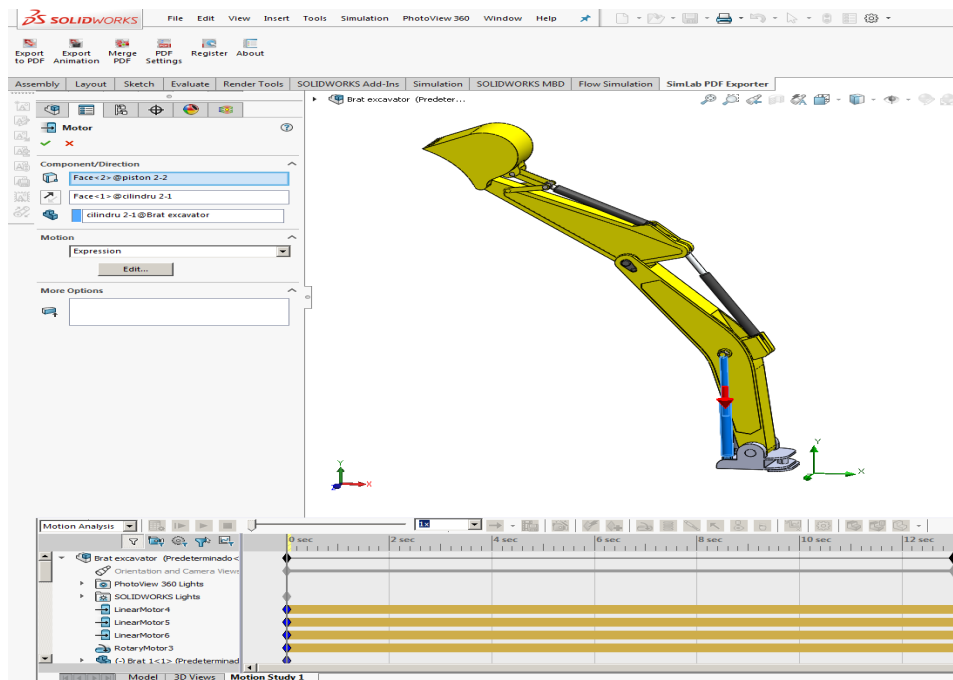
Attachment of the linear drive motor of the hydraulic cylinder for lifting the boom
